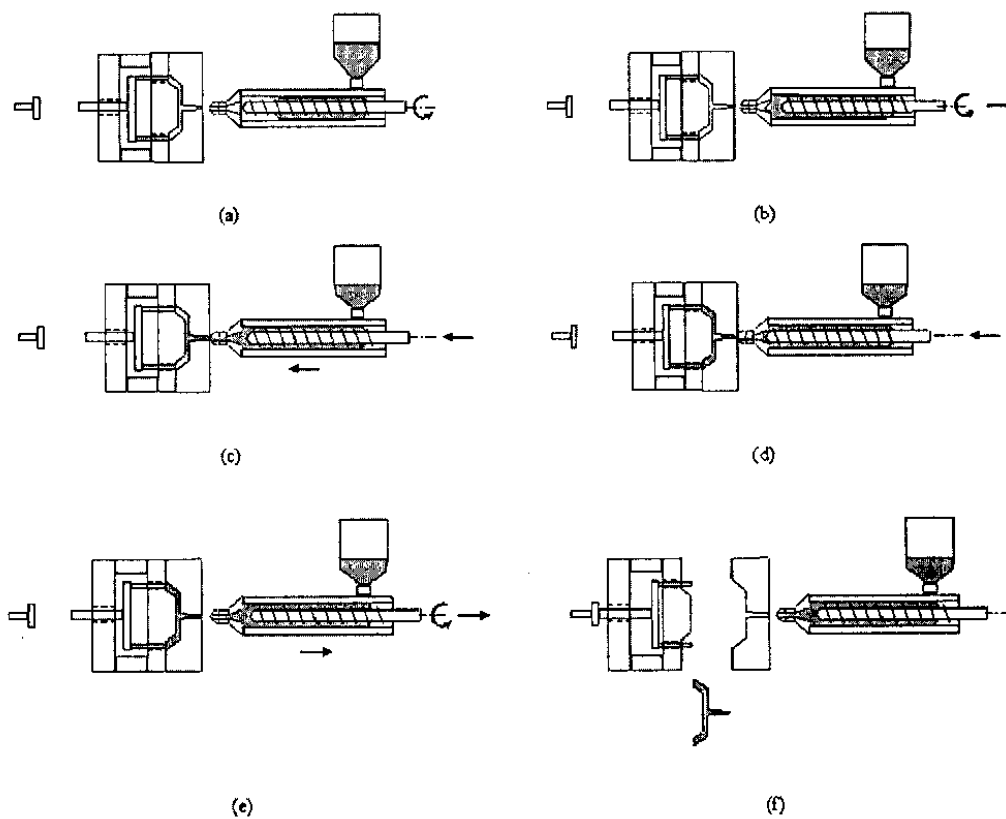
Basic operations of the injection moulding cycle: (a) start up; (b) screw back 1; (c) injection; (d) hold-on; (e) screw back 2; (f) cooling and ejection [51].
